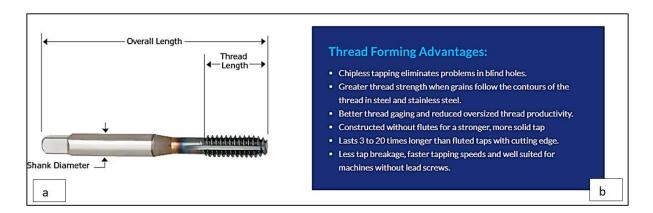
(a) Diagram of a thread-forming tap, (b) thread forming advantages
